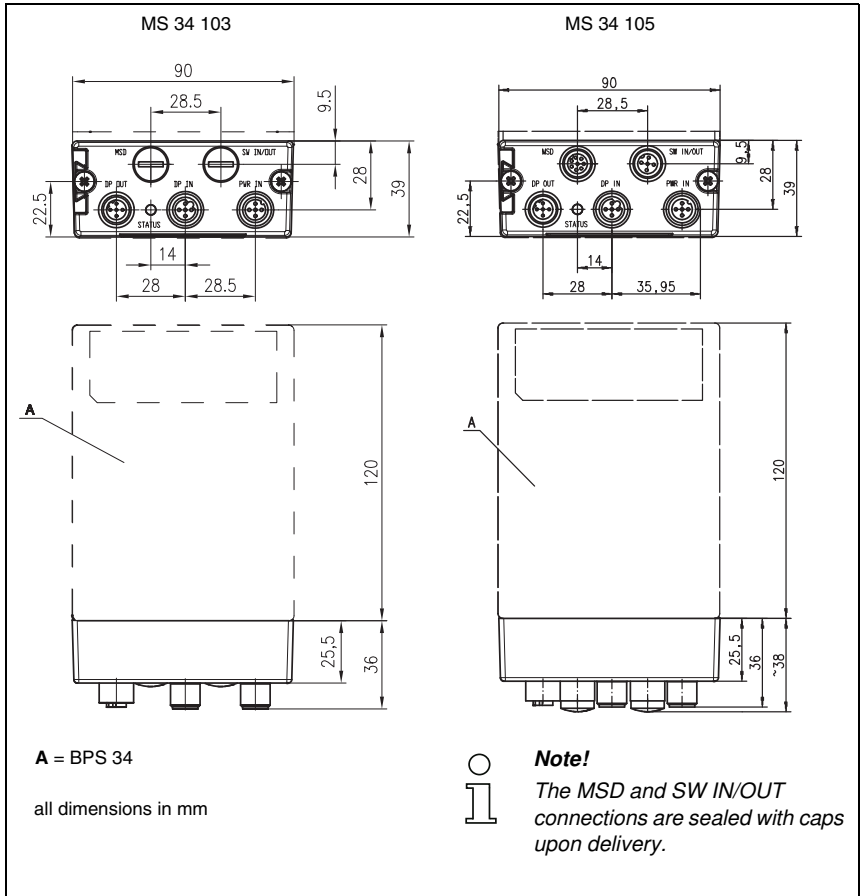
Dimensioned drawing MS 34 103 / MS 34 105
